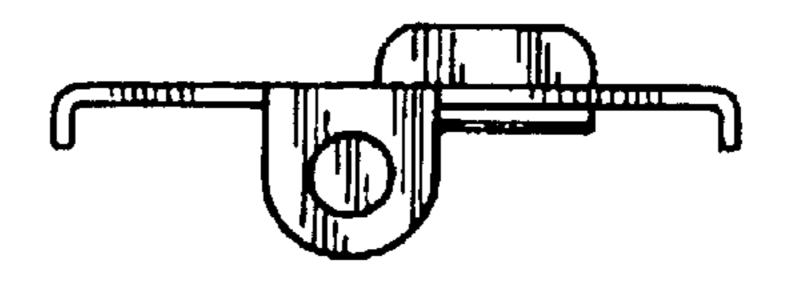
is a rear side view of a door latch in accordance with the invention showing the door latch in a "closed" position.
